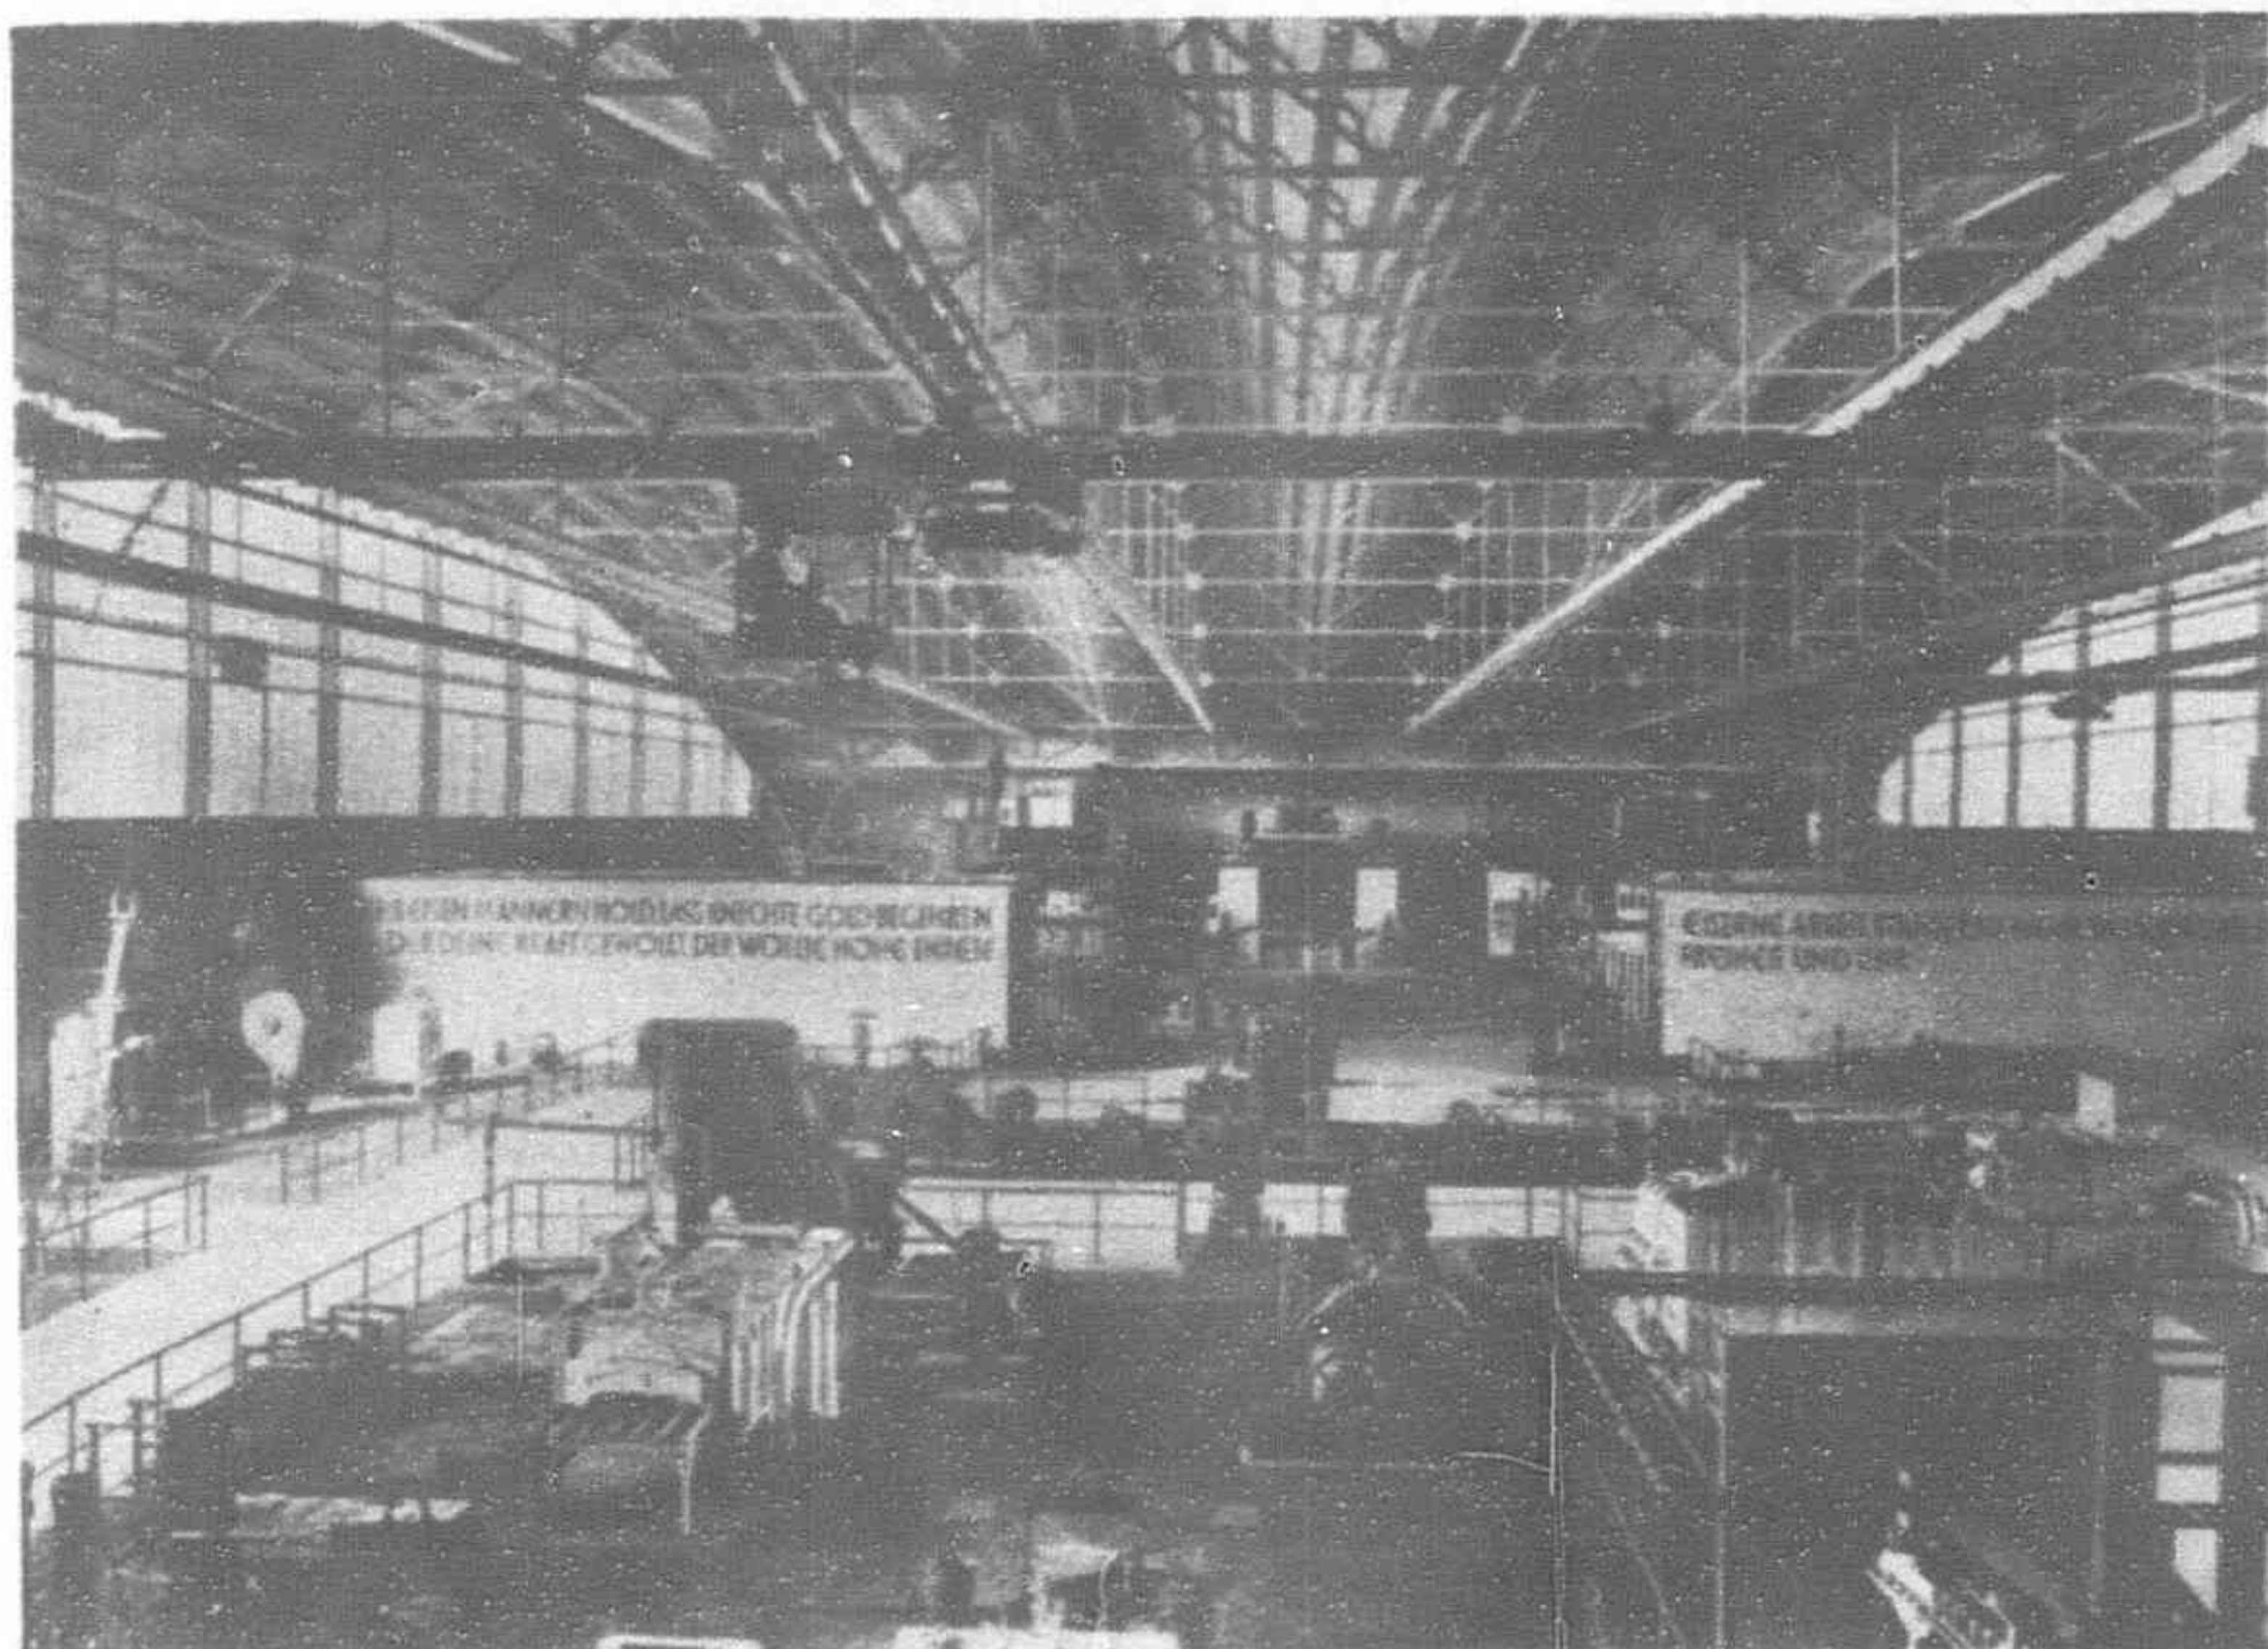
Plan of the Demag suspension crane plant in the "Stahl und Eisen" Pavilion
